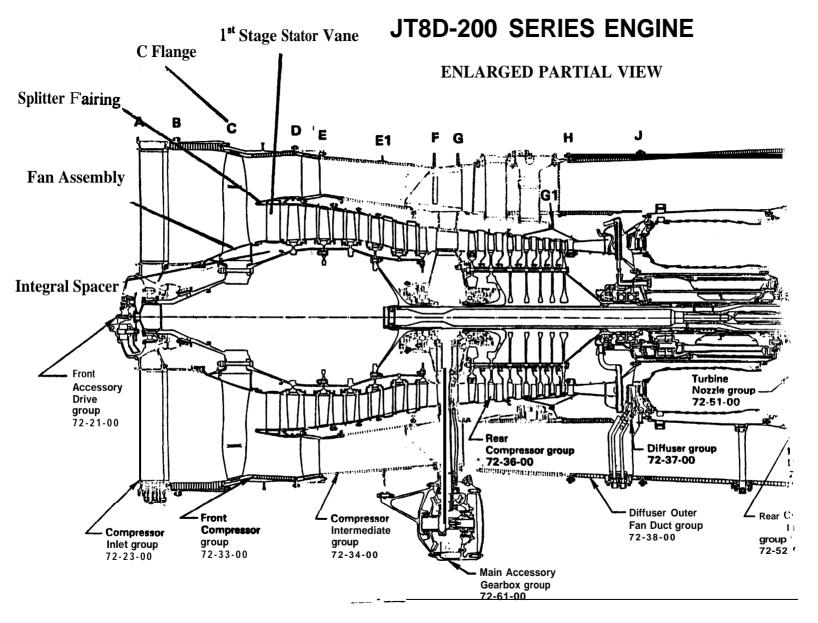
Enlarged, partial view of outer engine case of JT8D-200 series engine.
